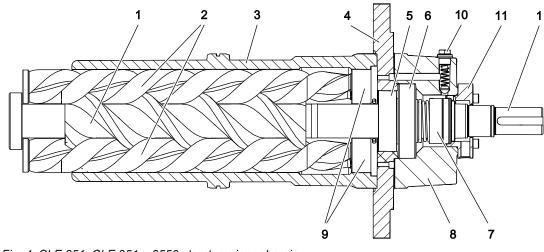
CLE 851, CLE 951 – 3550 structure, inner bearing
